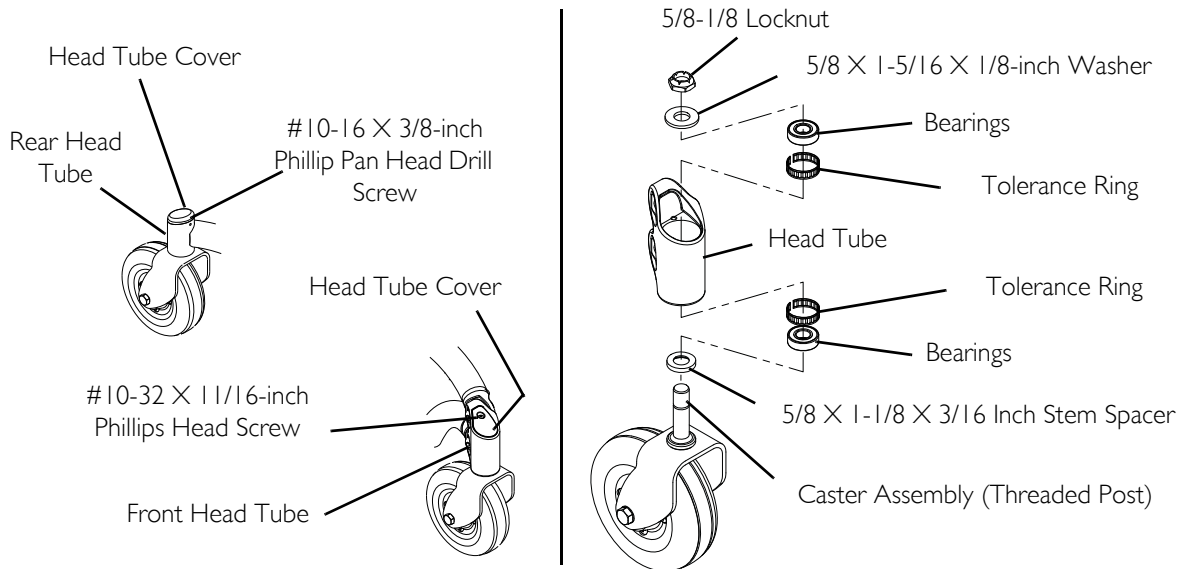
Removing/Installing the Caster Fork Assemblies
